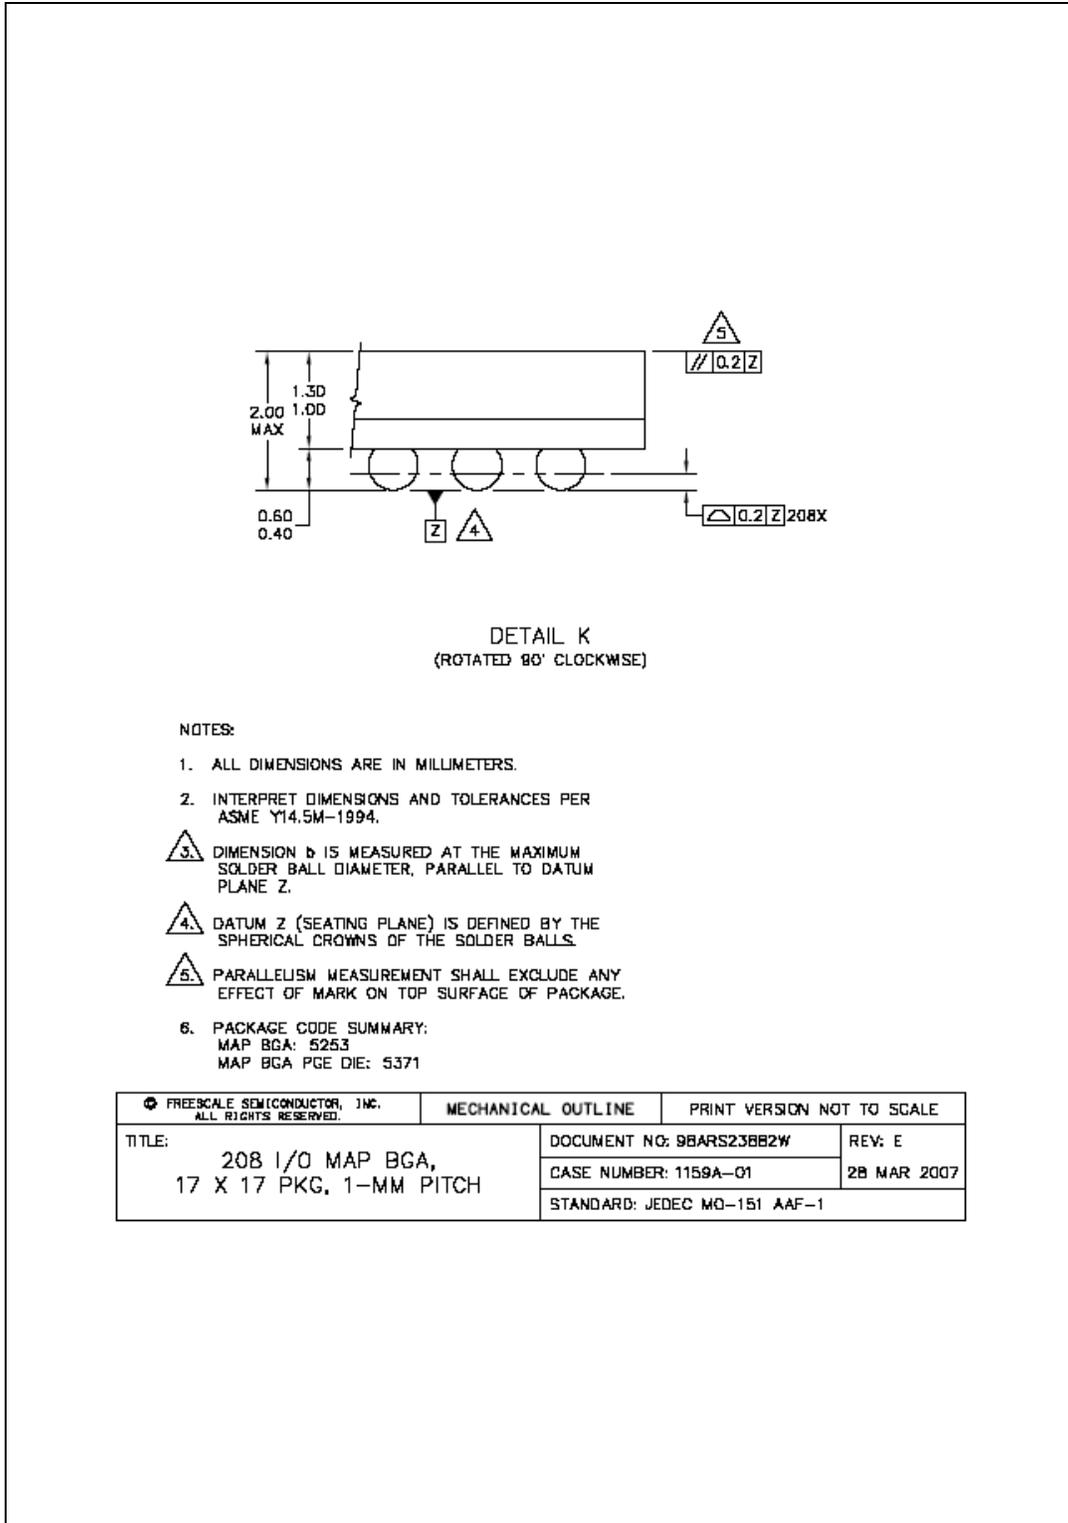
208 MAPBGA package mechanical drawing (2 of 2)
